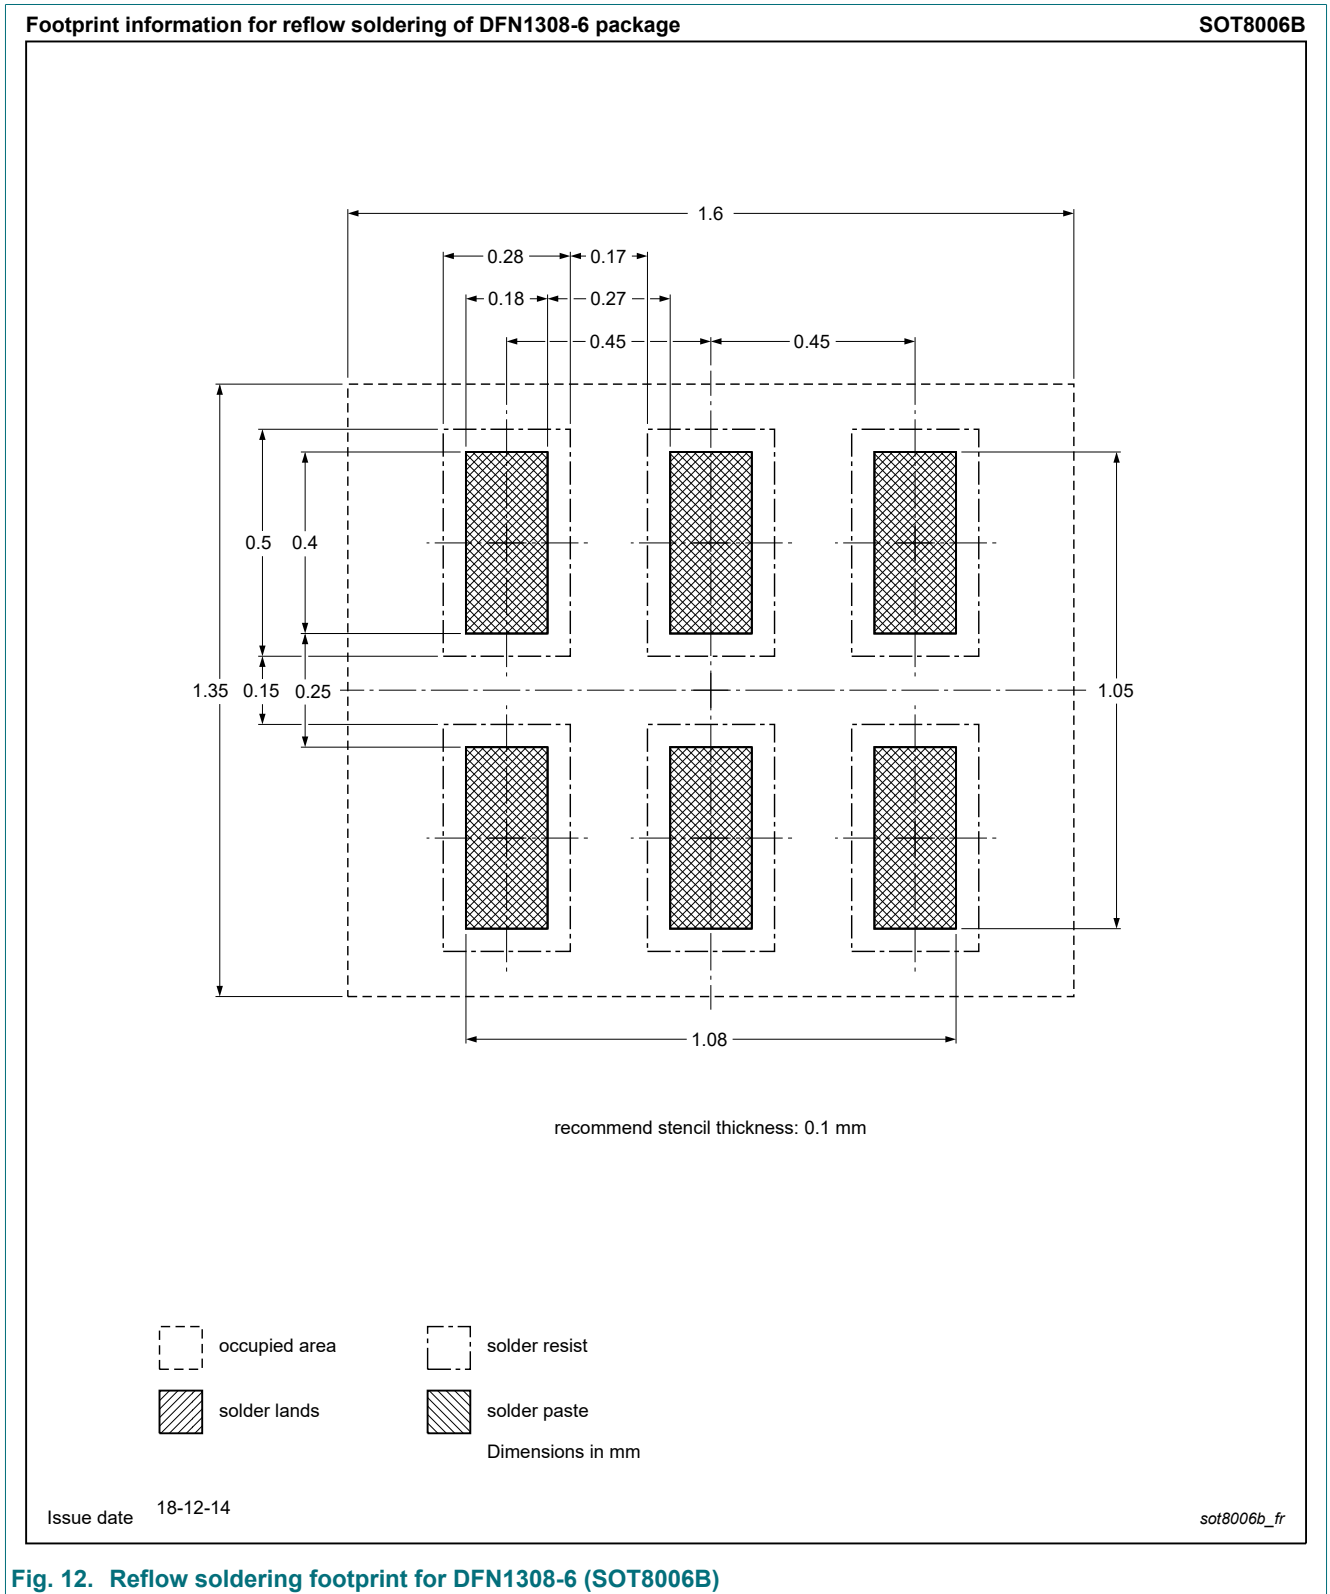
Reflow soldering footprint for DFN1308-6 (SOT8006B)
